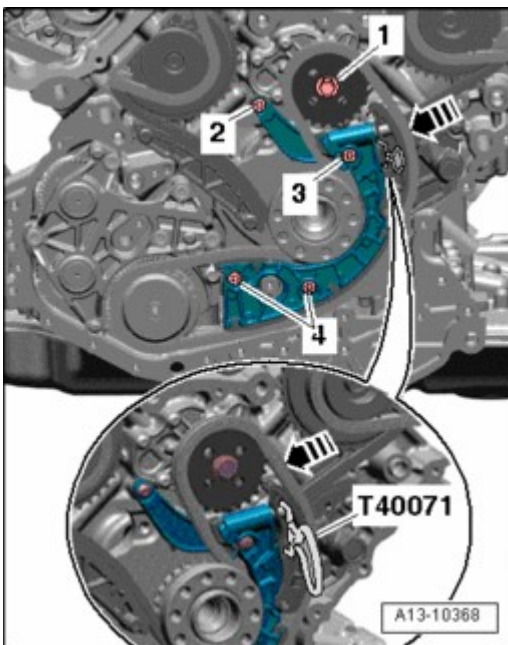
Pressing Tensioning Rail, Securing Chain Tensioner With Locking Pin T40071, Removing Bolts, Balance Shaft Chain Sprocket & Chain Tensioner
